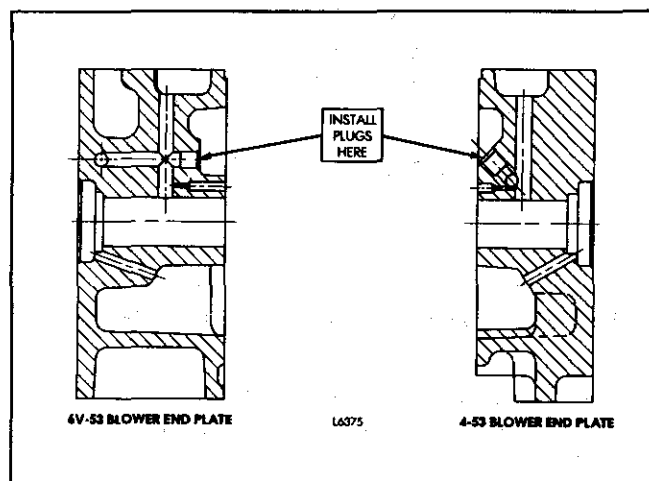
Location of Holes to be Plugged - Blower End Plates
